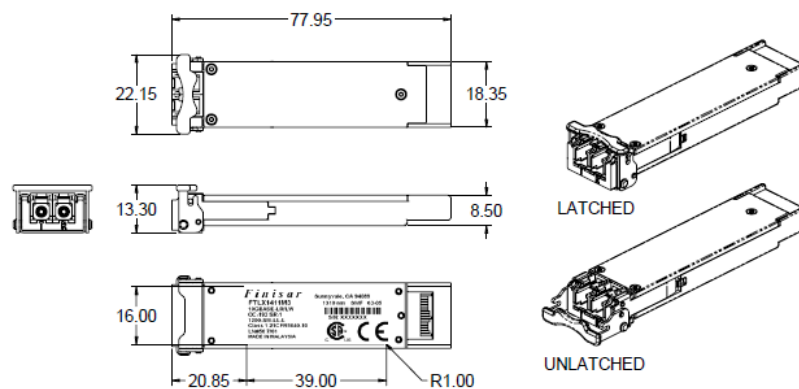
XFP transceiver and its mechanical dimensions [mm] [12]
